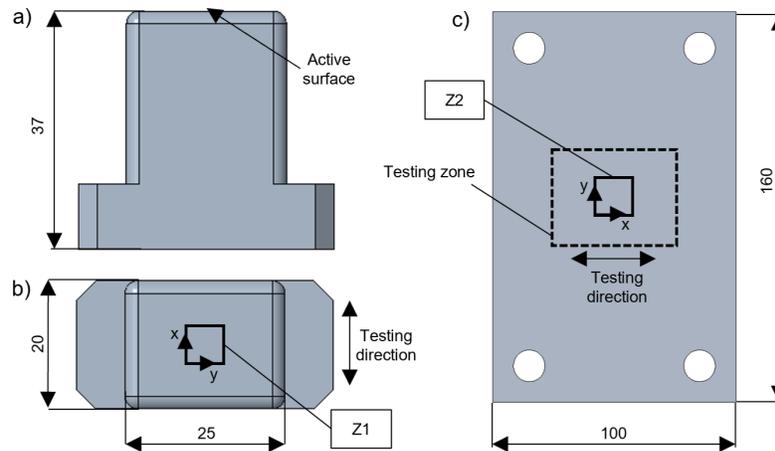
Punch and specimen geometries: a) punch front view; b) punch plant view; c) specimen.
